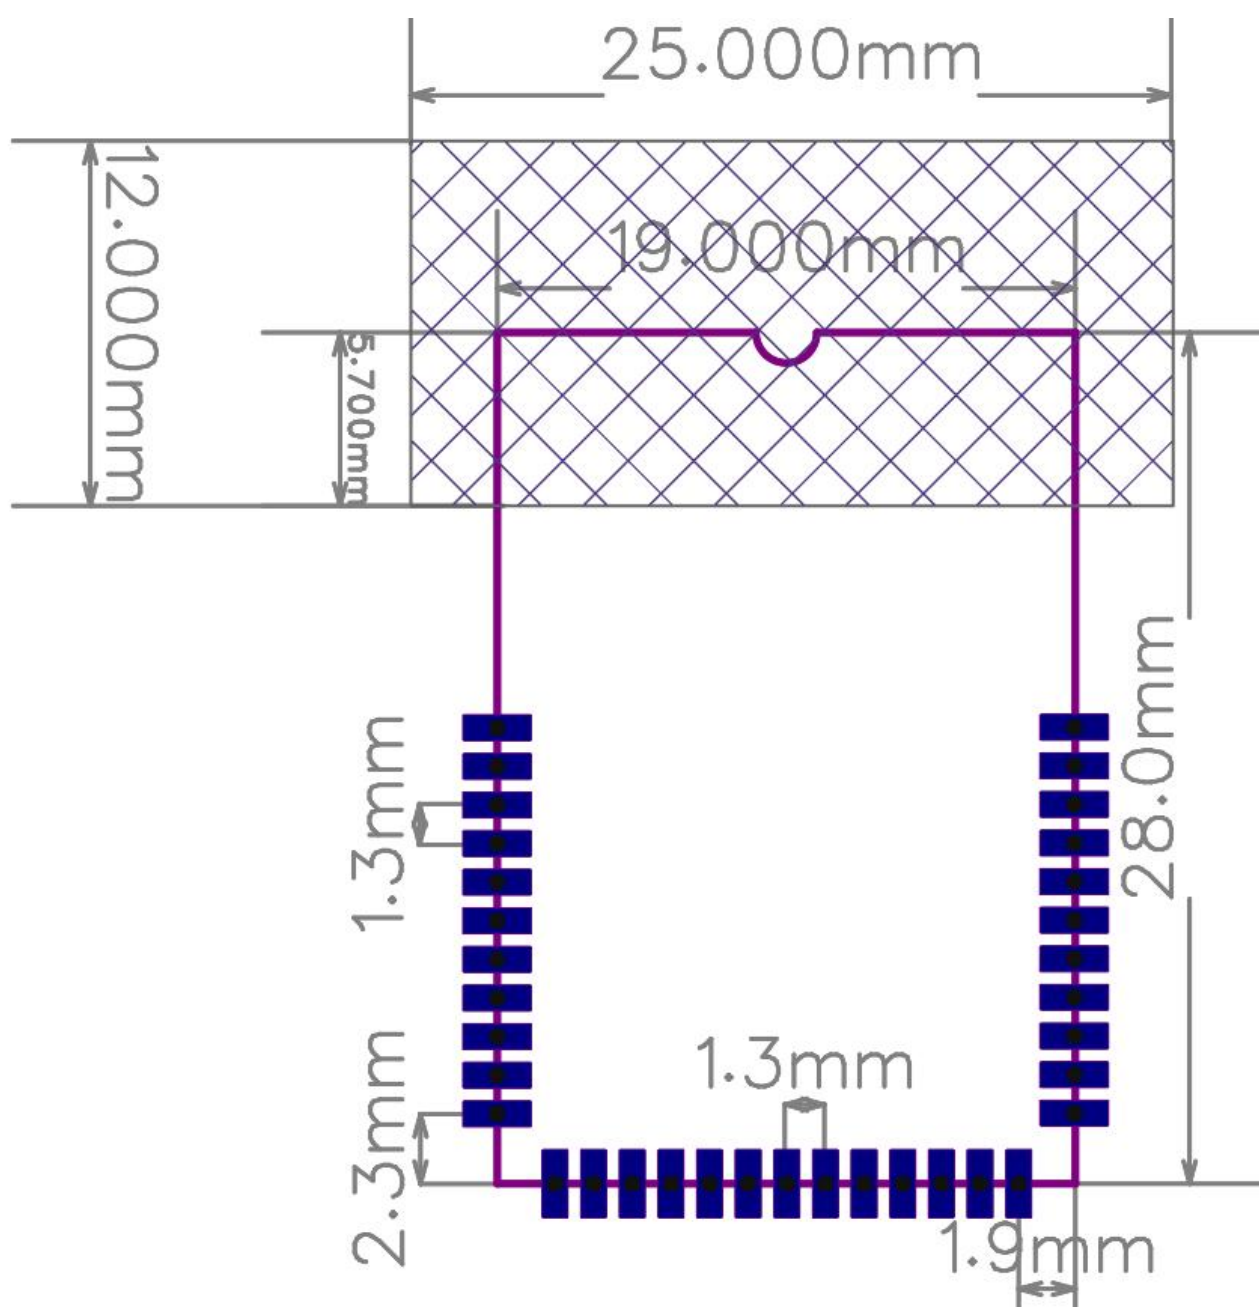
SKU625 PCB Footprint and Dimensions(units: mm)
